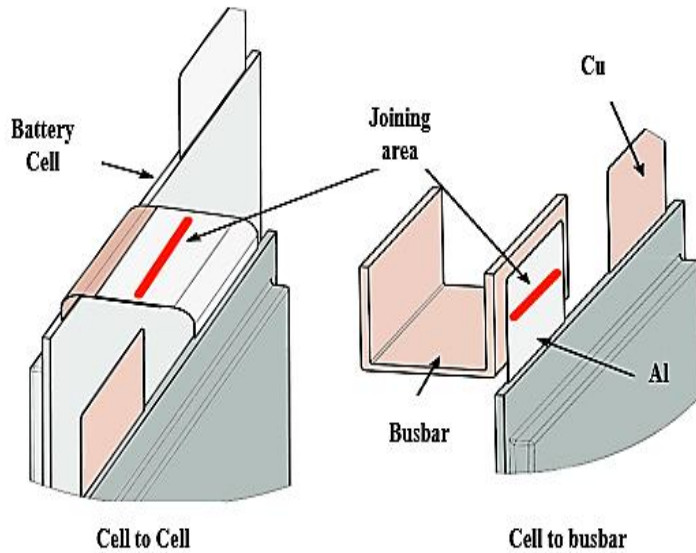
Al/Cu welded joints of EV Battery Pack
